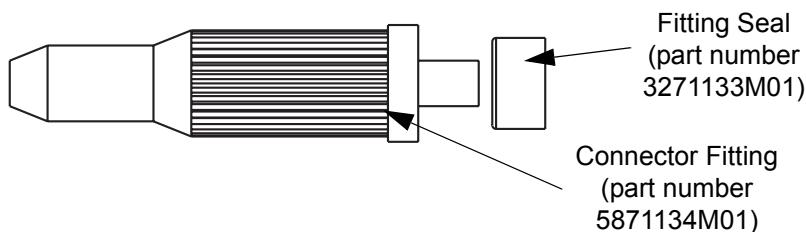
Connector Fitting - Fitting Seal Pump Connector
